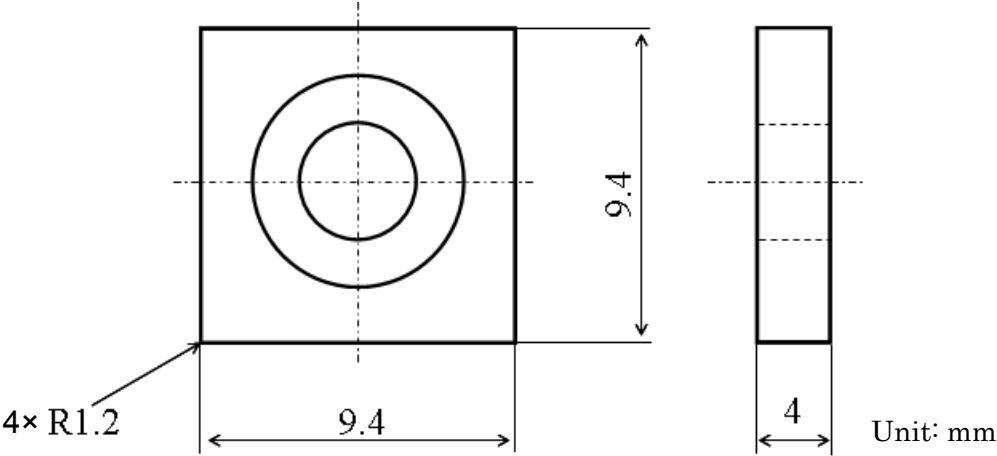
Throw away cutter holder for tilt taper end mill.
